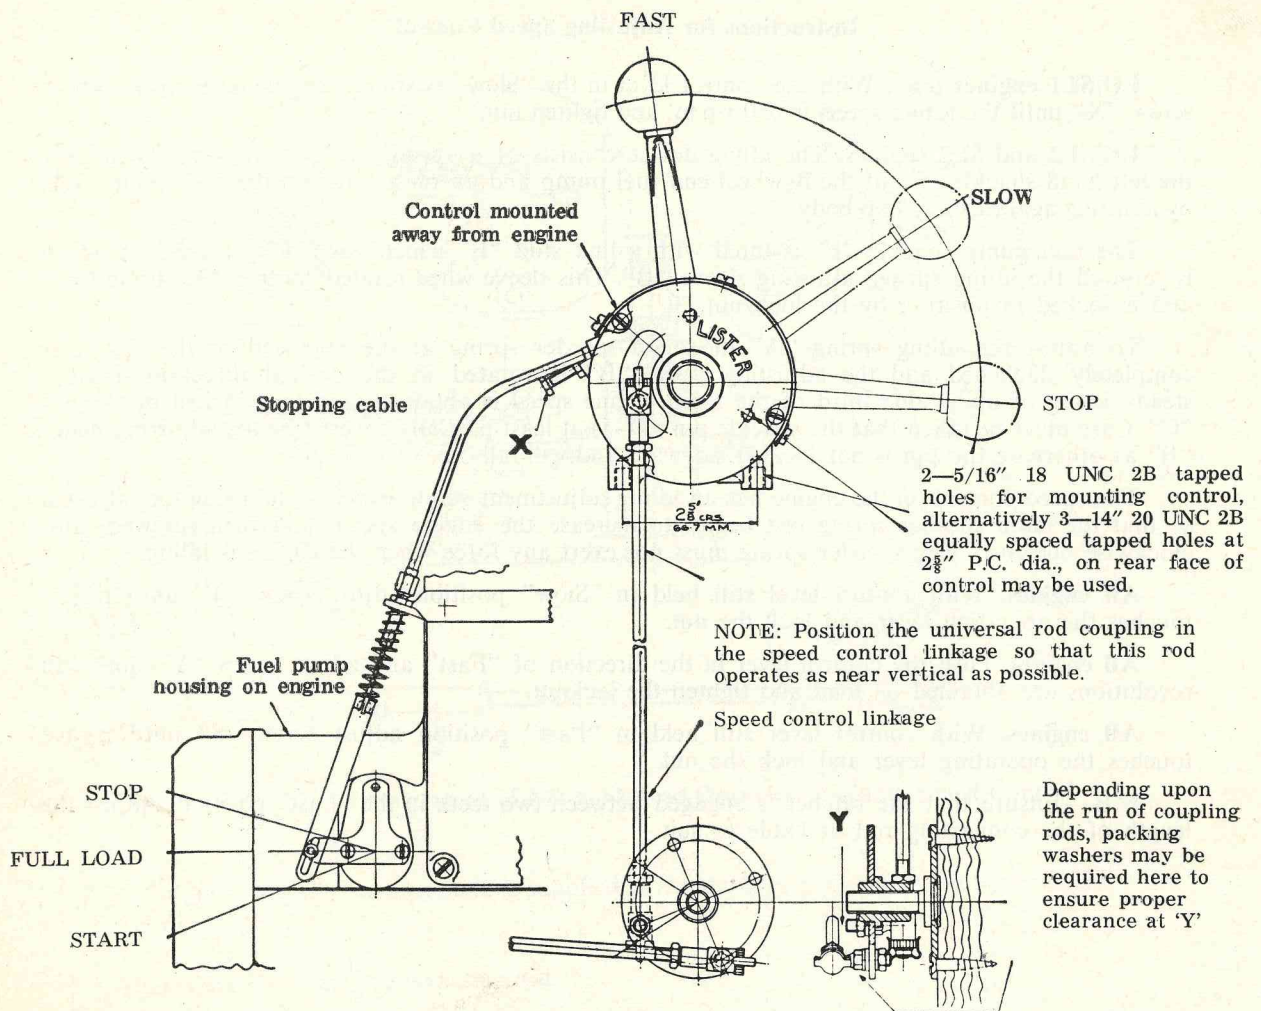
Arrangement of Single Lever Speed and Stop Control.
